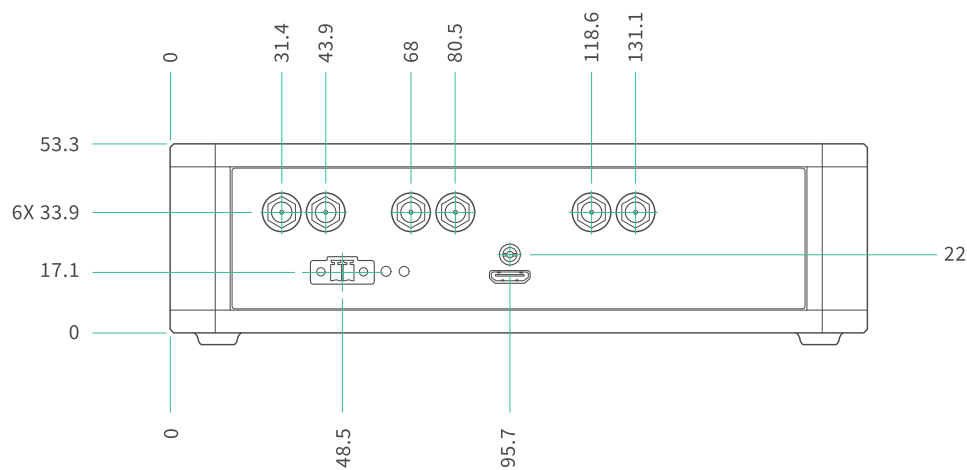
mmRH-5592 Mechanical Dimensions, Top View
